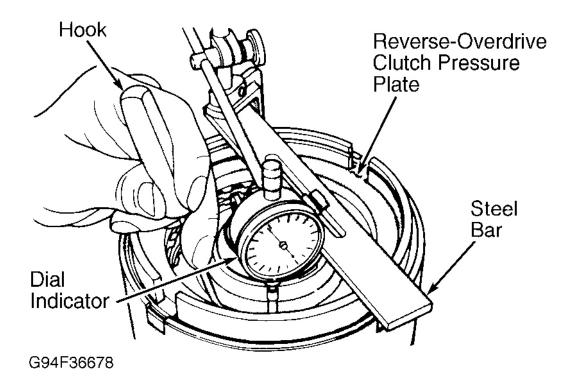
Checking Overdrive Clutch Clearance Courtesy of CHRYSLER LLC
